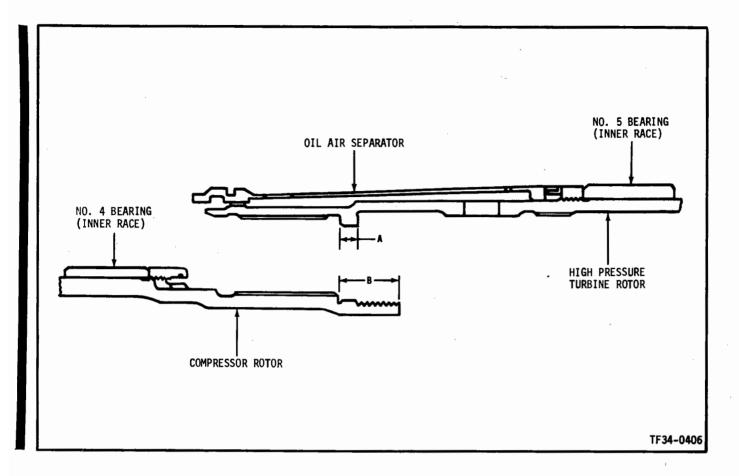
Seating Check - High-Pressure Turbine Rotor
